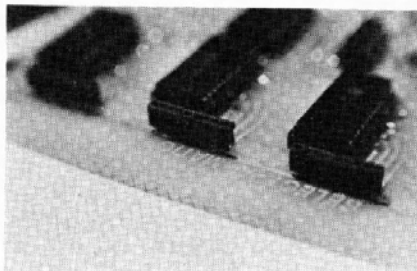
HEADER STRIPS are used to make the connections between the I/O boards and the logic board.
